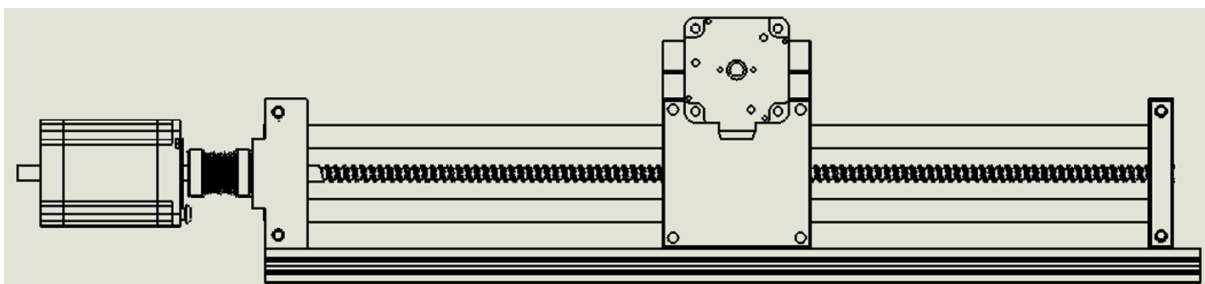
Cross sectional view of NEMA 23 motor along with lead screw and slider
